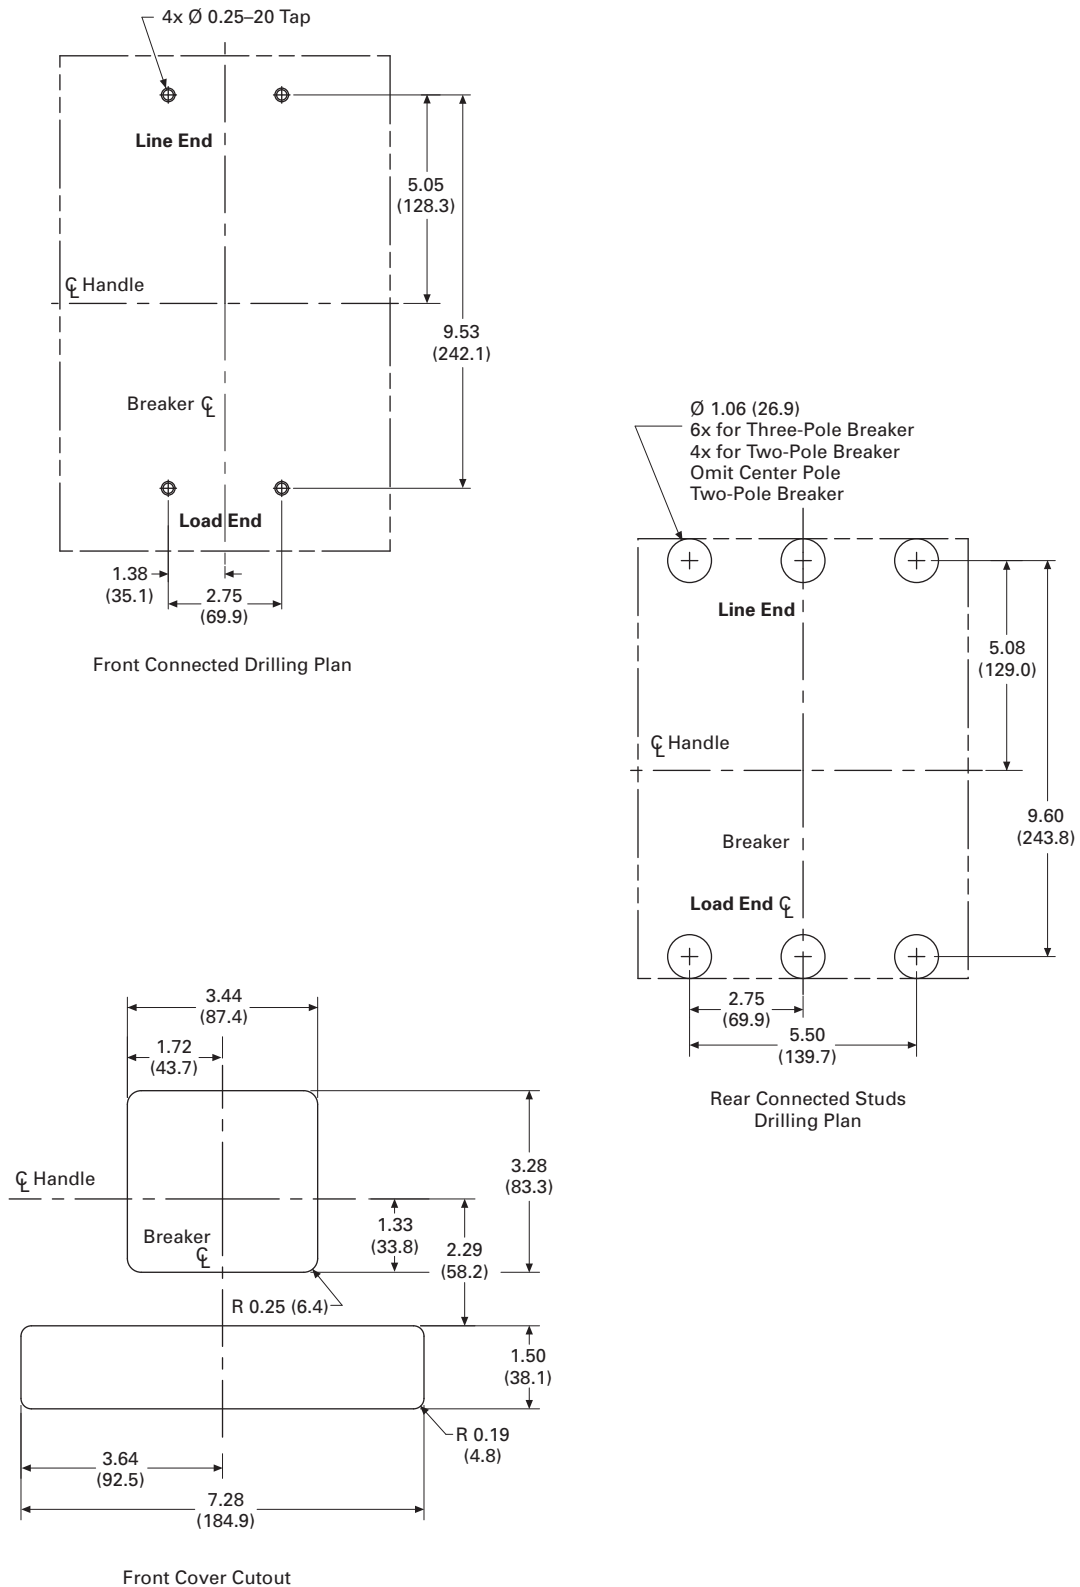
Type LG 450-600A Three-Pole Cutout and Drilling Plan—Dimensions in Inches (mm)
